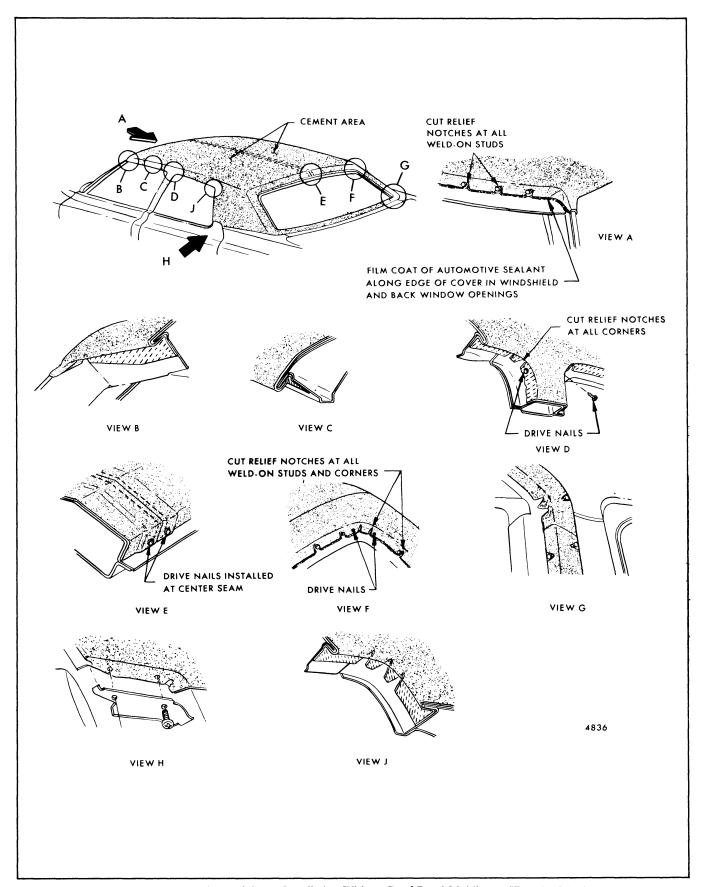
Typical Fabric Roof Cover Installation Without Roof Panel Moldings - "B and C" Styles
